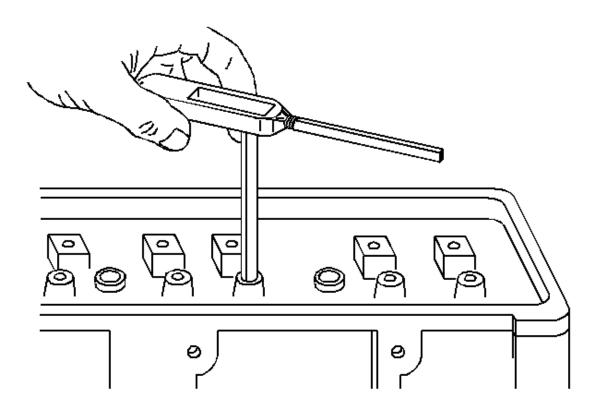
Measuring Valve Stem-To-Guide Clearance Courtesy of GENERAL MOTORS CORP.
